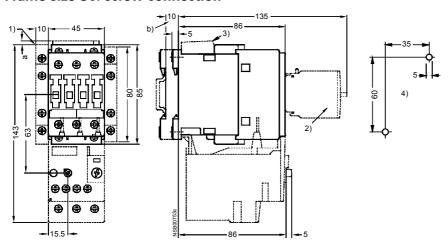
3RT10 2 contactors. 3RT10 2 coupling contactors with surge suppressor, auxiliary contact block and installed overload relay
